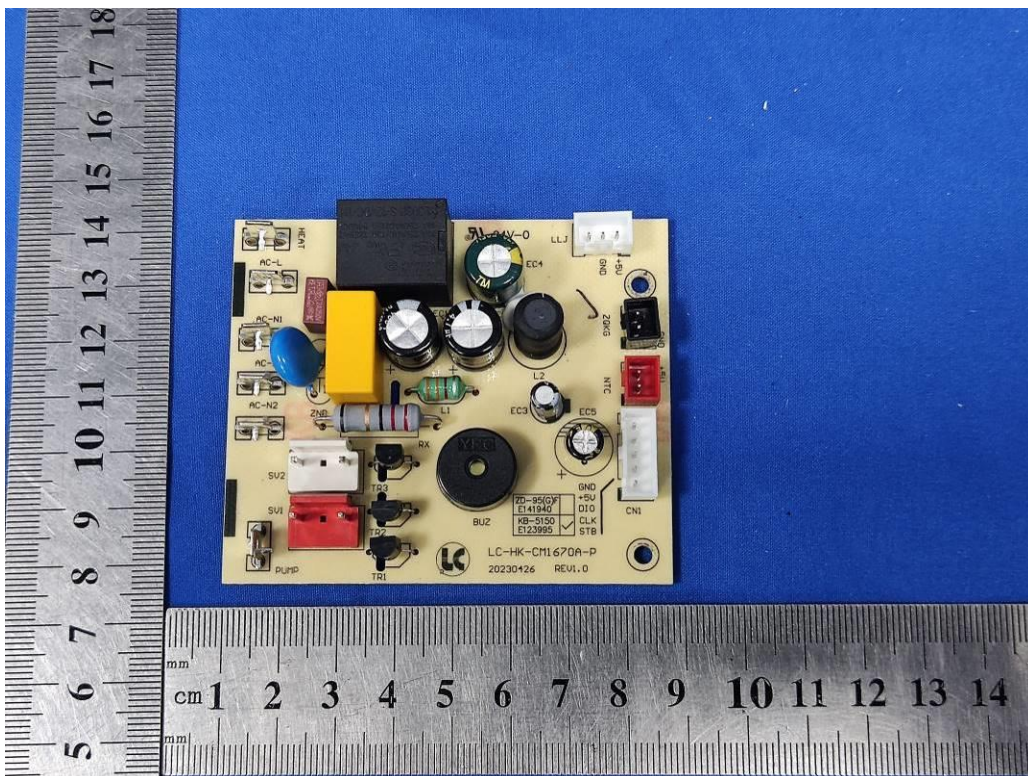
Main PCB view (4700 GENSE, CM1670A)
